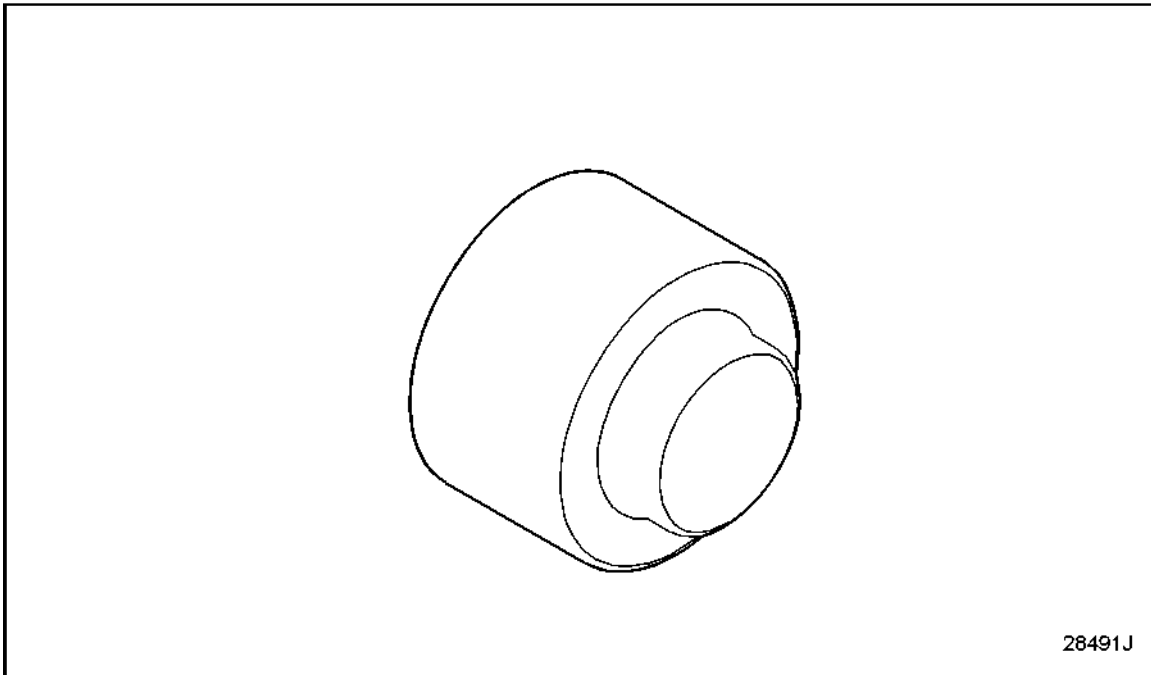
Piston Pin Retainer Installer,J 24274-B
